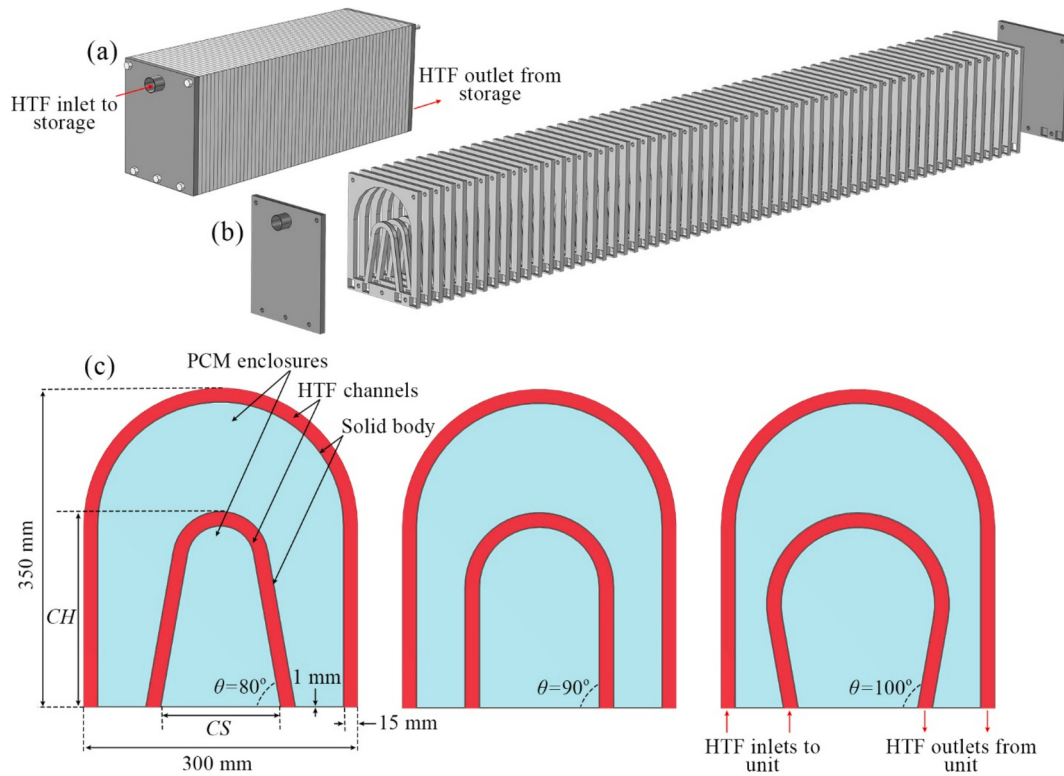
(a) Assembled view of the proposed energy storage system showing HTF inlet and outlet ports; (b) Exploded view illustrating the modular arrangement of 60 individual storage units; (c) Cross-sectional geometry of a representative unit showing PCM enclosure, outer and central HTF channels, geometric parameters, and different channel inclination angles ($\theta = 80^\circ, 90^\circ, \text{ and } 100^\circ$).
